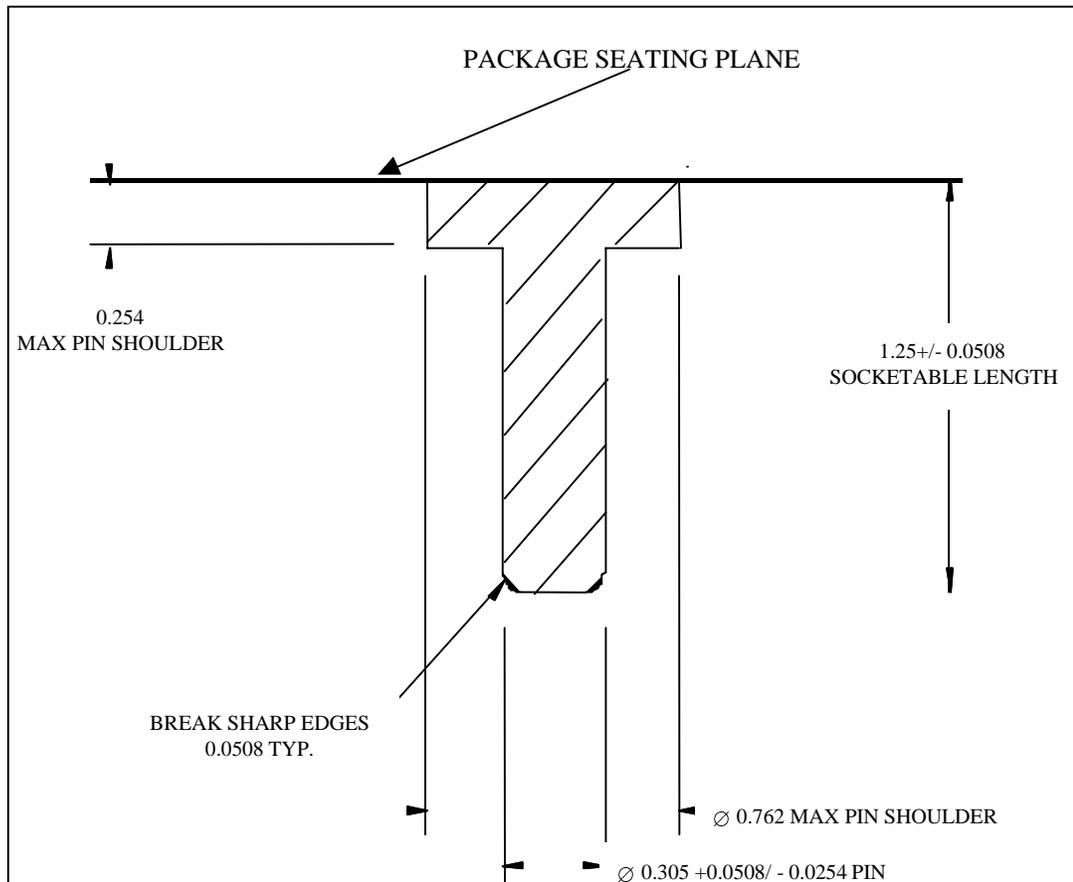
Pin shoulder drawing for 615-pin Micro-PGA and 495-pin Micro-PGA packages.
